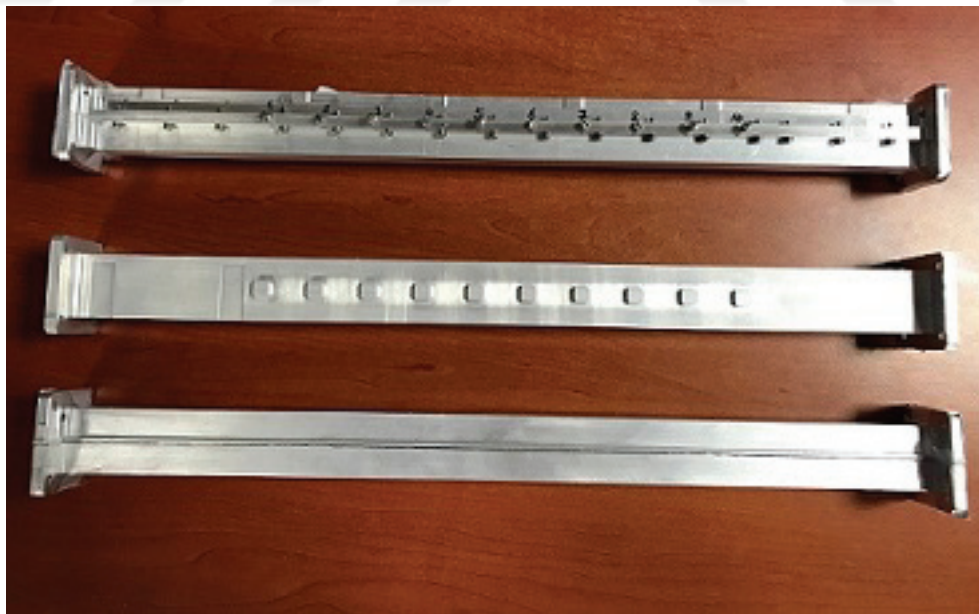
Screw connection, brazing and laser welding manufacturing techniques (from top to bottom)
